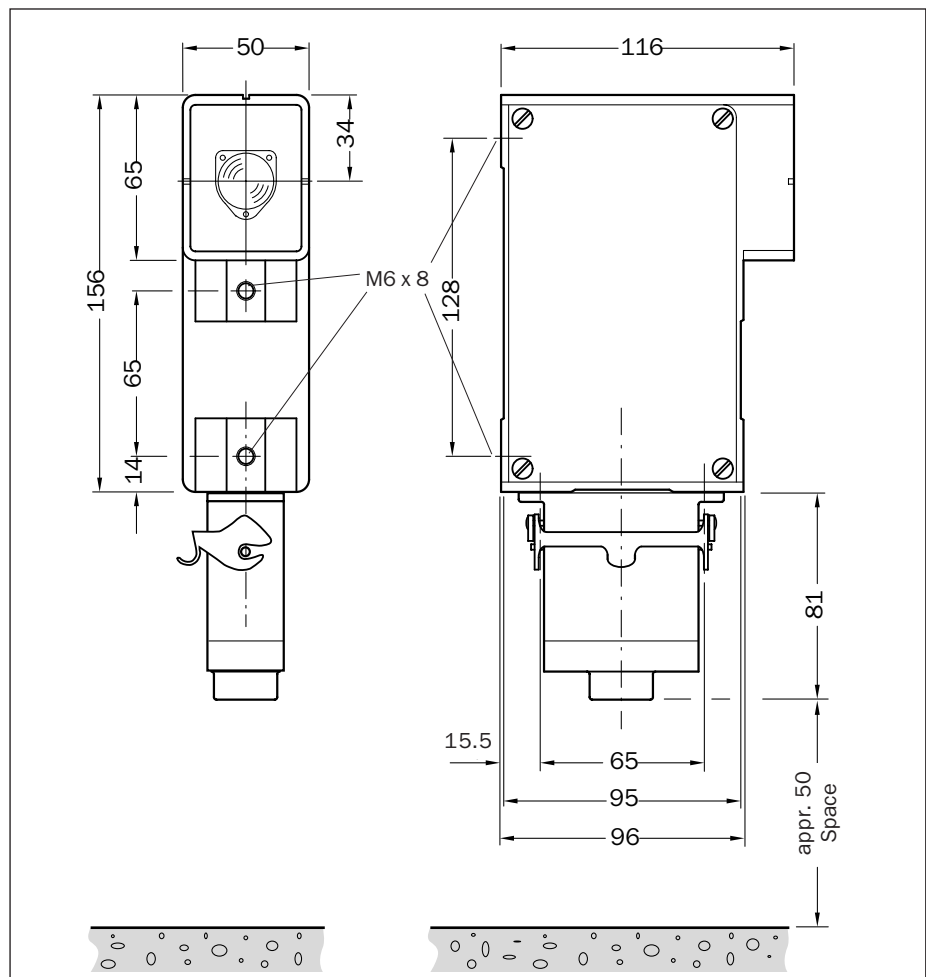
Dimensional Drawing WSU 26/2-xx4 and WEU 26/2-xx4
